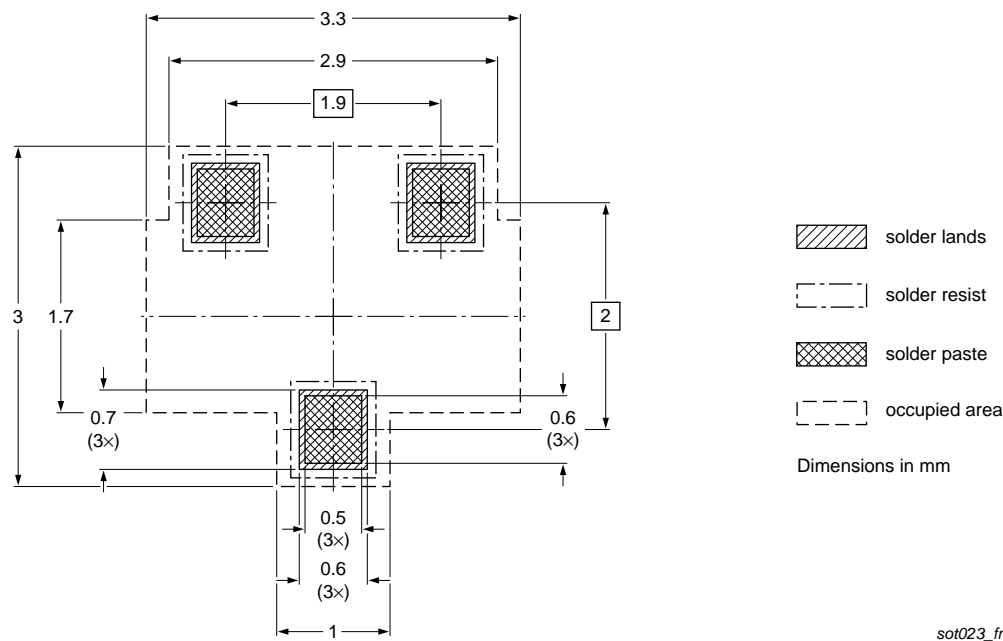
Reflow soldering footprint for SOT23 (TO-236AB)
